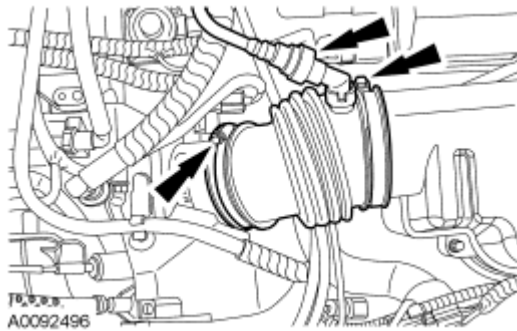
Locating Vent Tube, Outlet Pipe And Clamp
